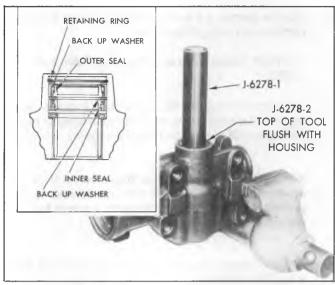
Installing Pitman Shaft Seals (On Bench)
